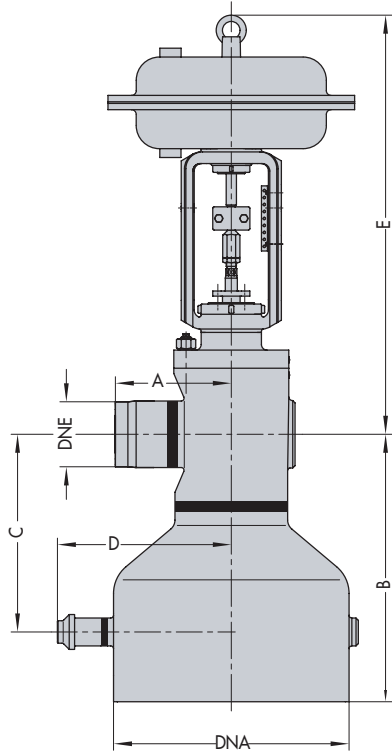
· Dimension diagram of Type DUV-C3 Steam-converting Valve with Type 3271 Pneumatic Actuator
